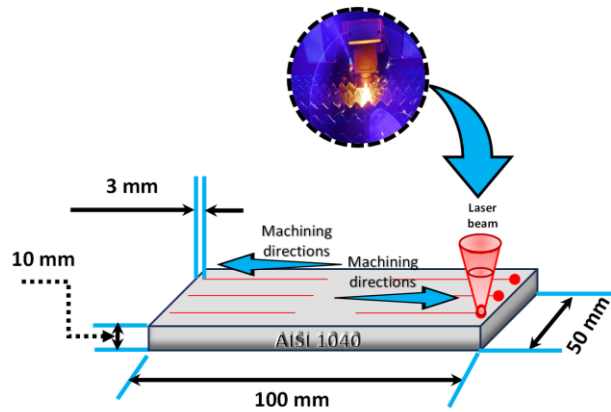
Dimensions of the workpieces and laser cutting method (also, an image taken during the cutting)
